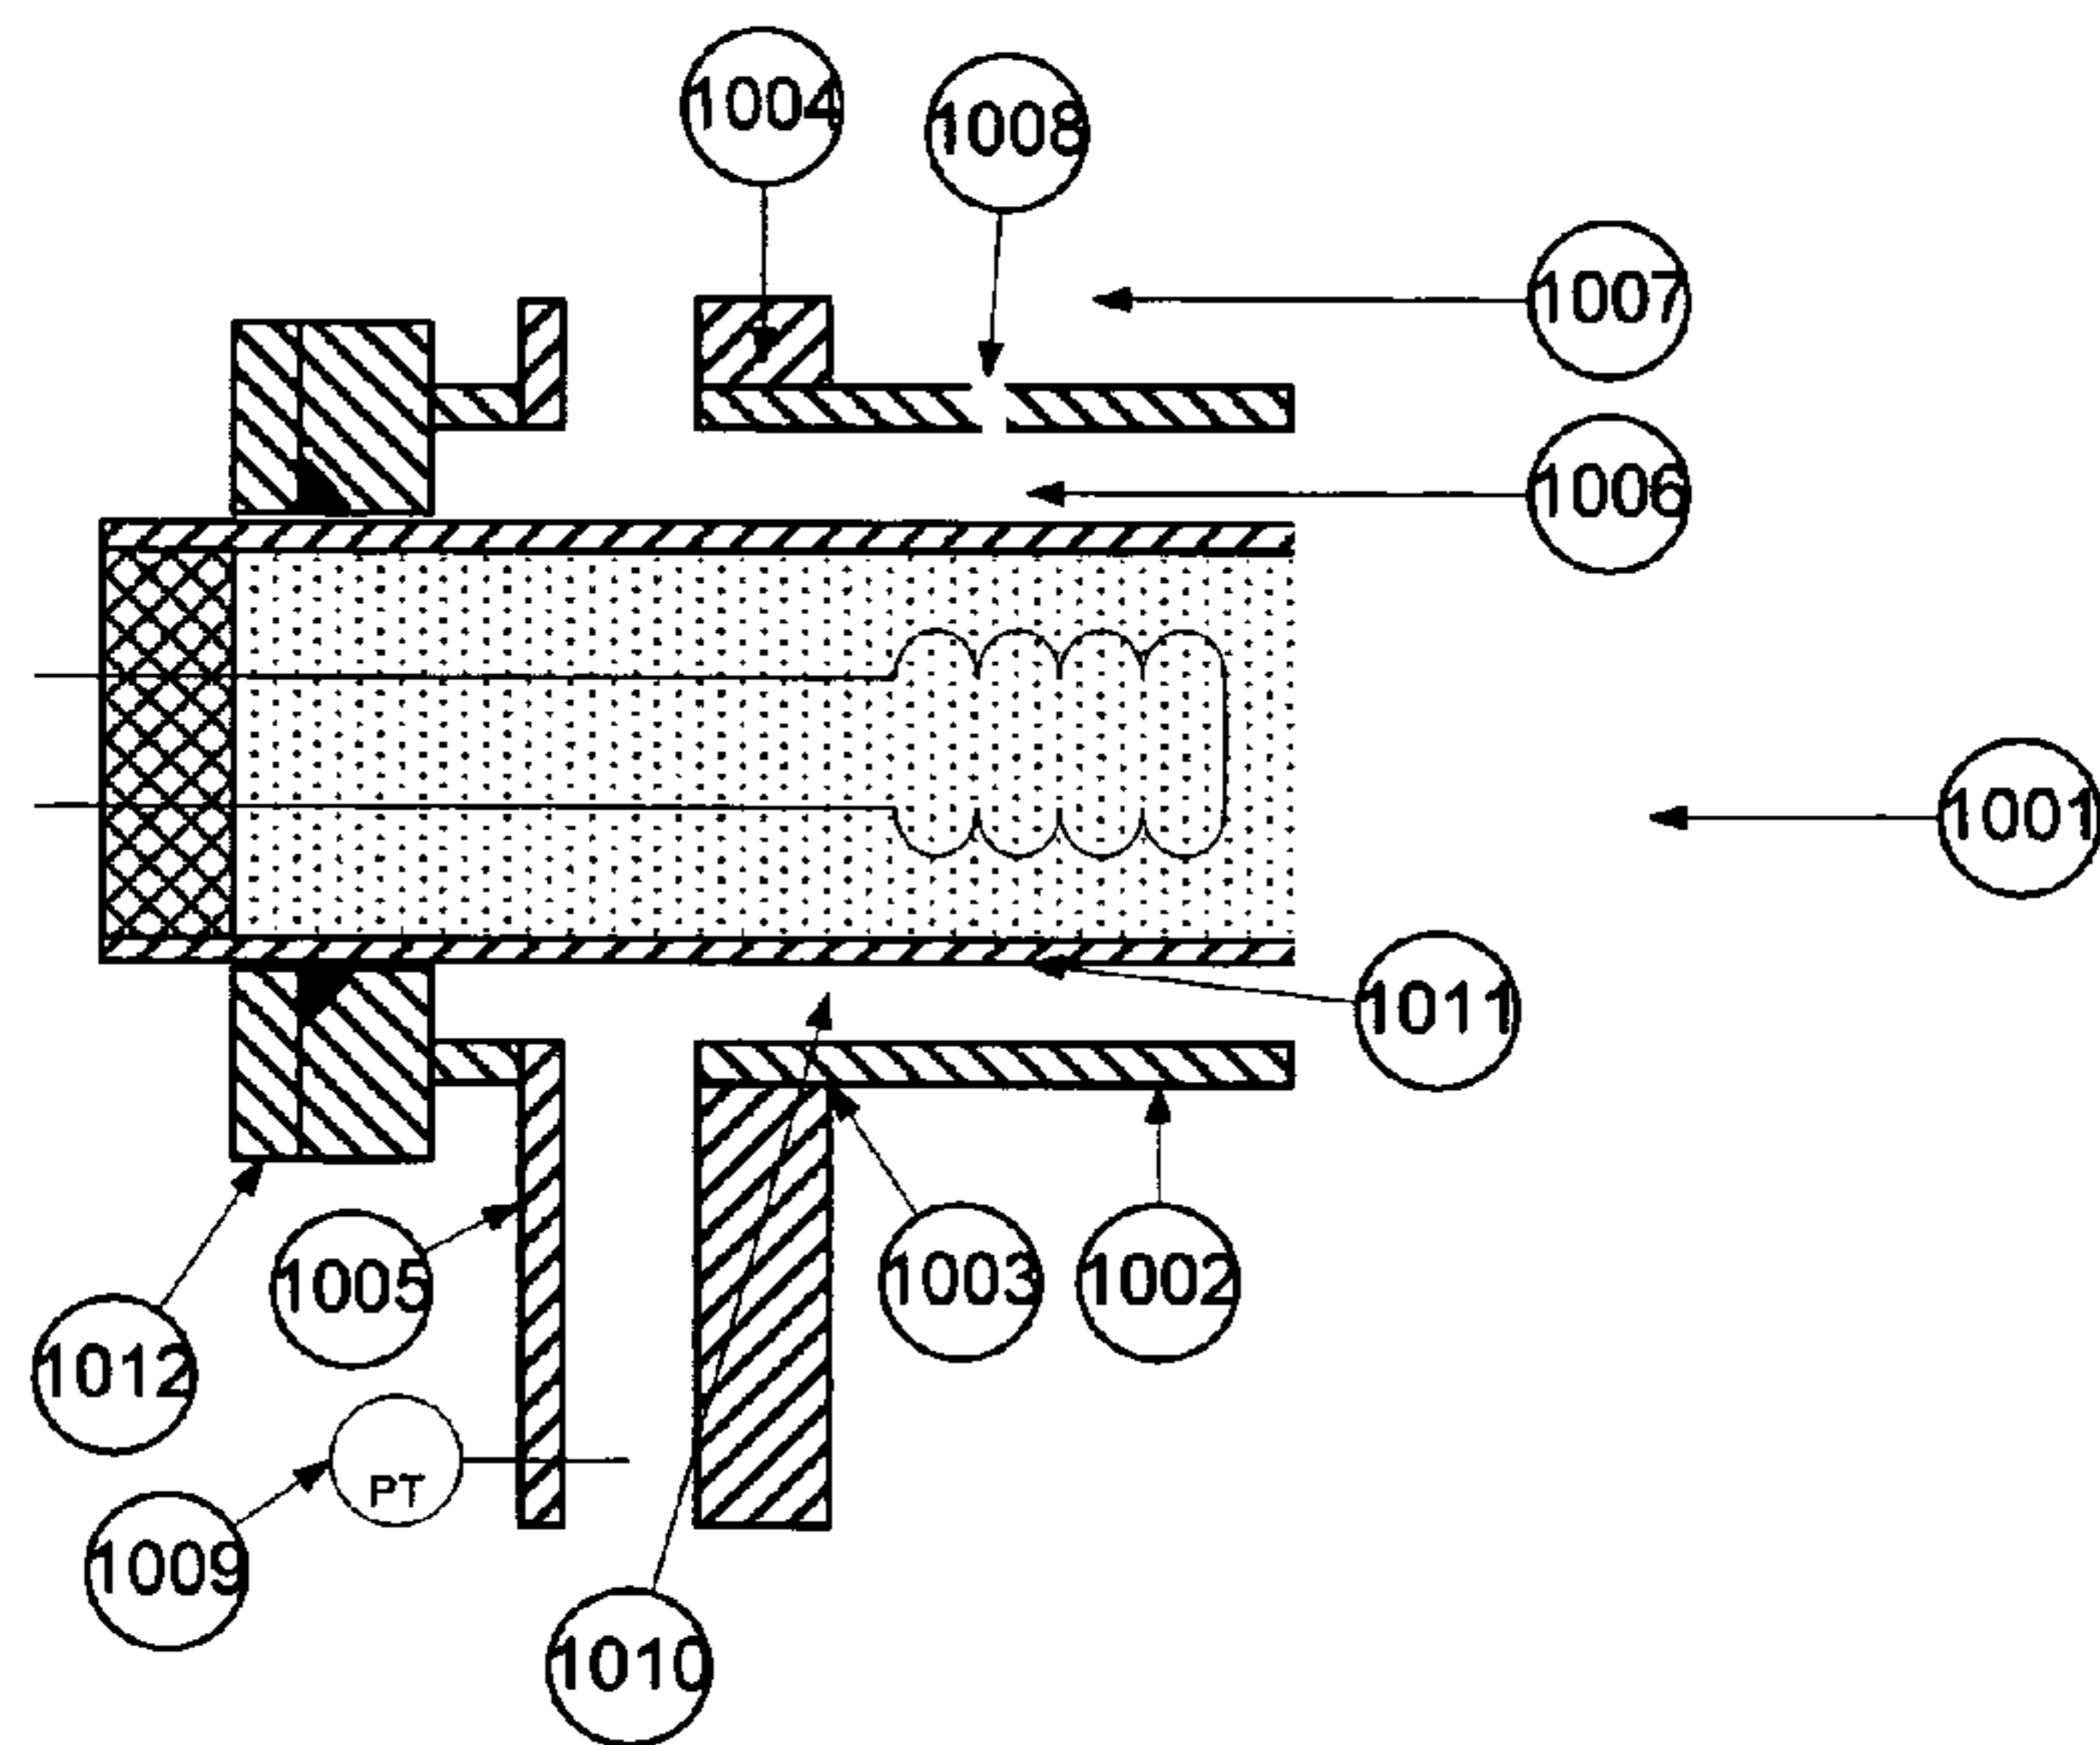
Detailed Cross sectional view showing the sealing of a heater rod and a protective tube to separate plates
